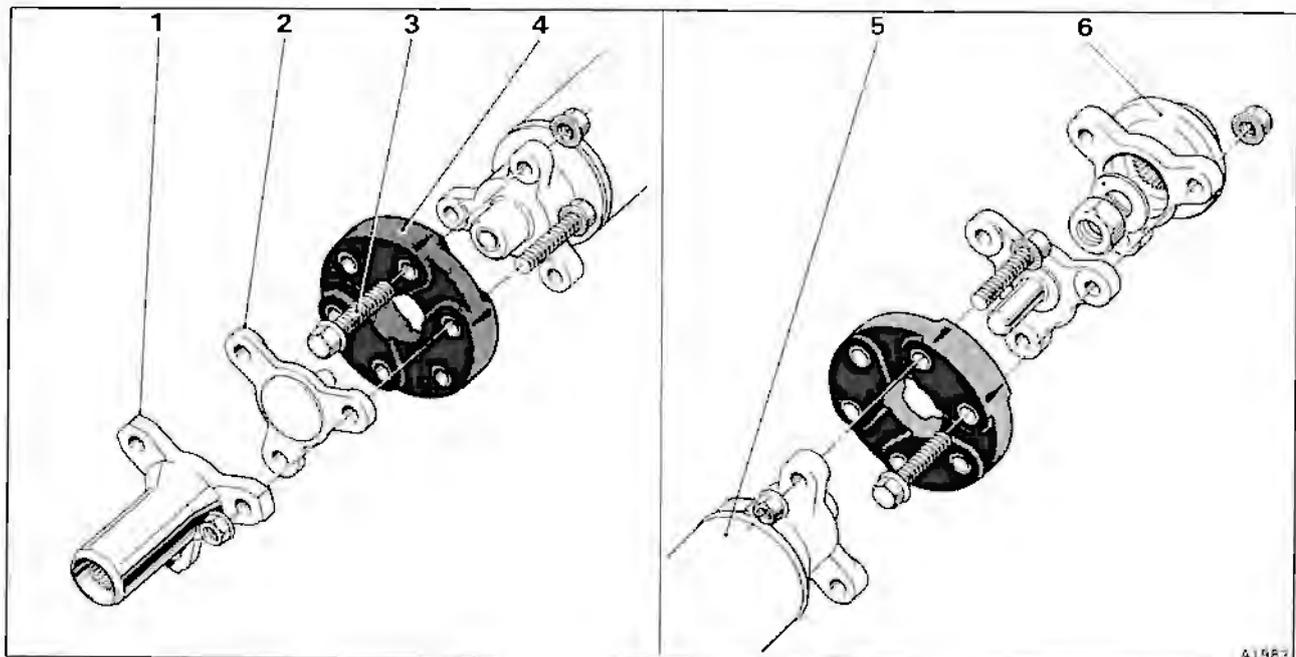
Propeller shaft/rubber flexible couplings – Gearbox and final drive
